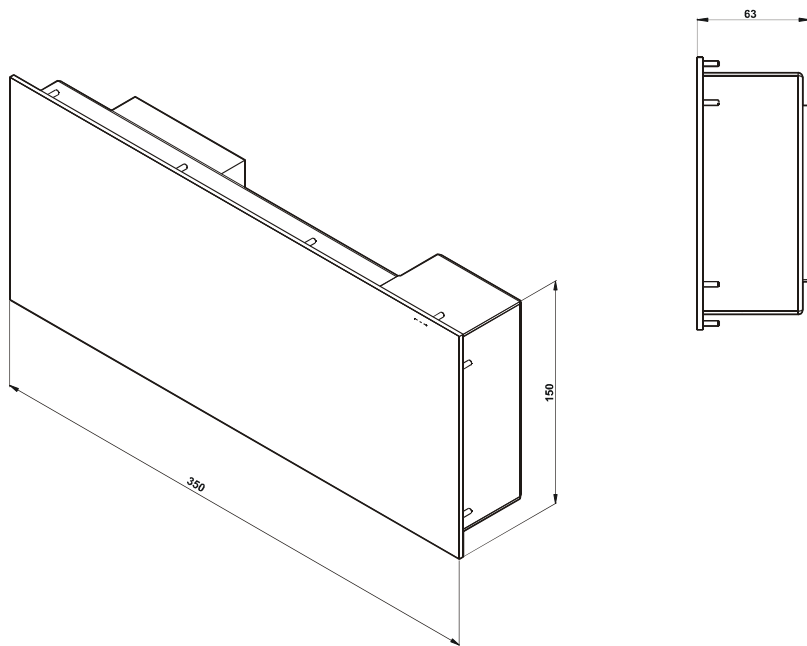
Transas ES4 dedicated keyboard. Dimensional drawing of Keyboard
